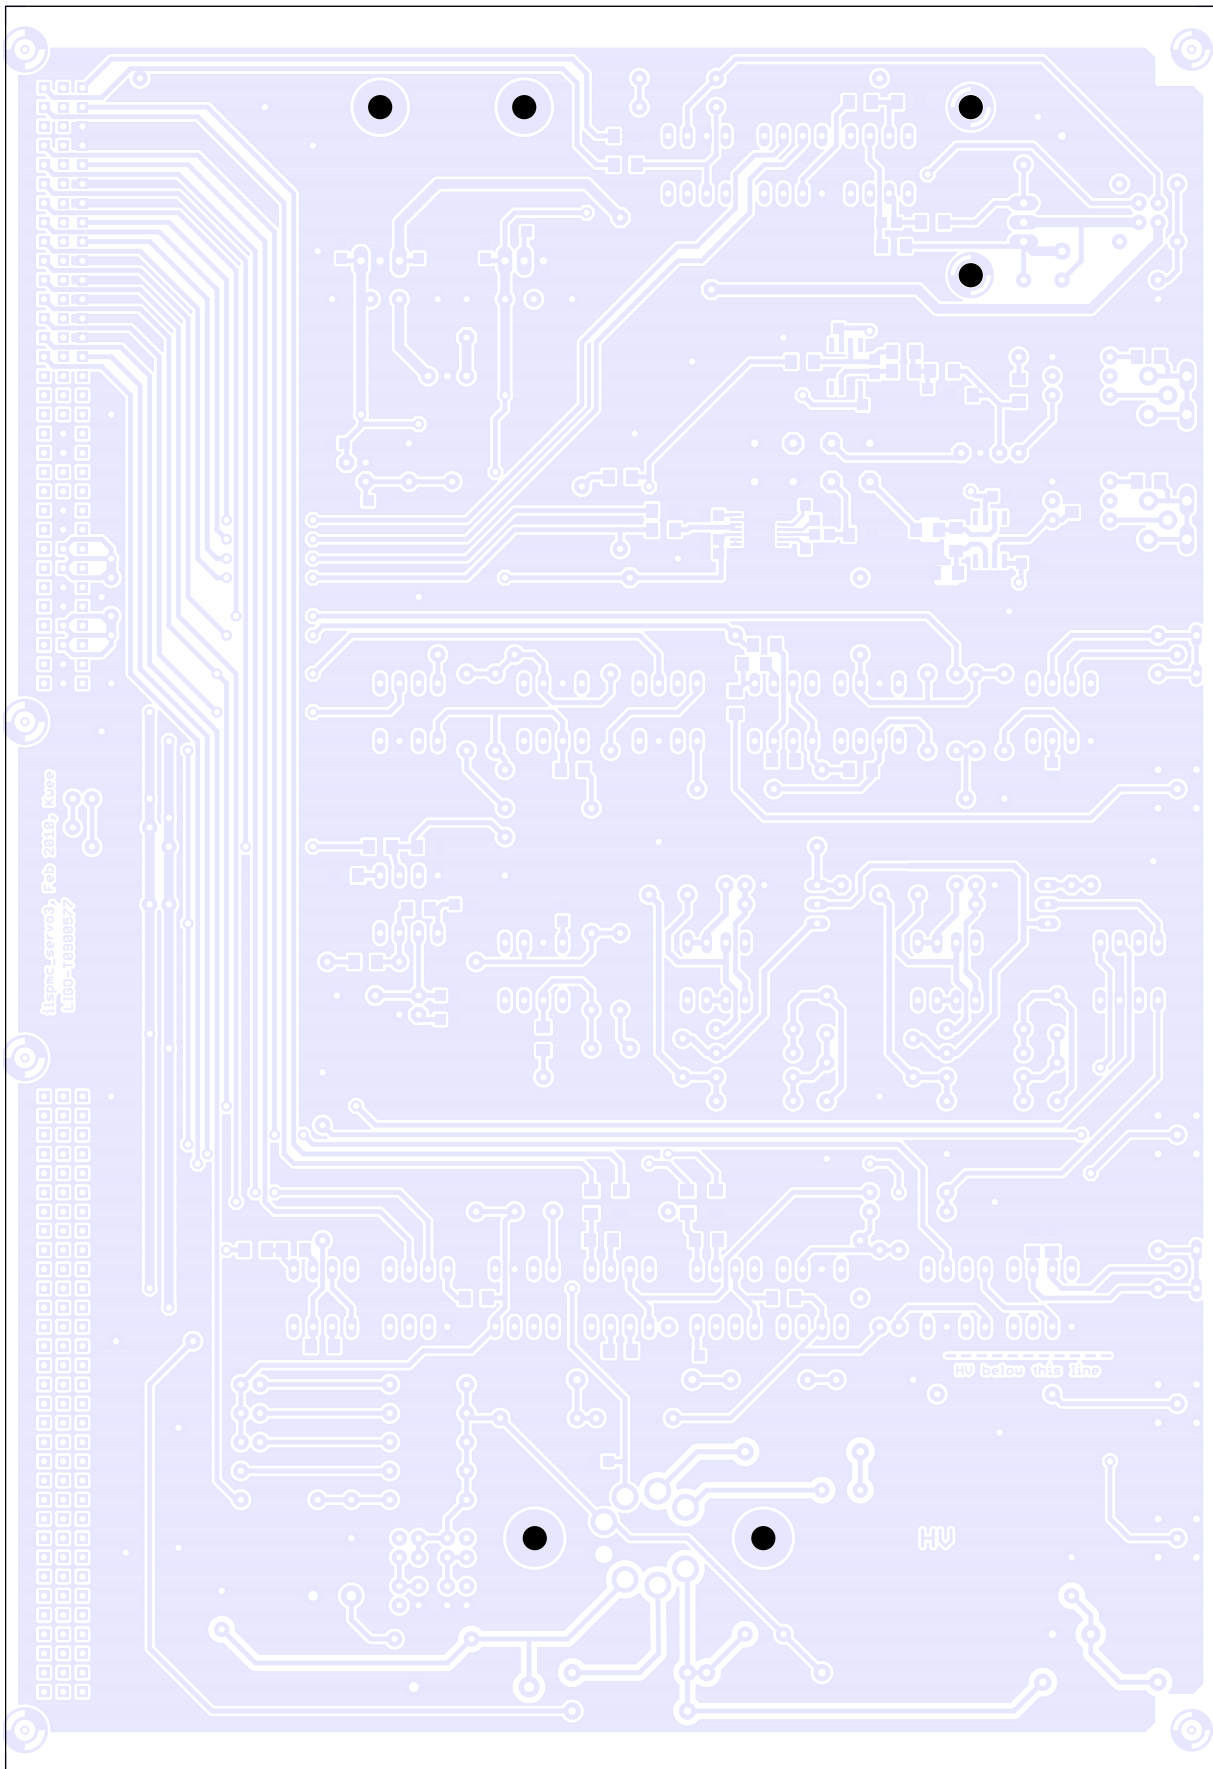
Board bottom view showing drills with 1.3 mm (0.051 in) diameter
